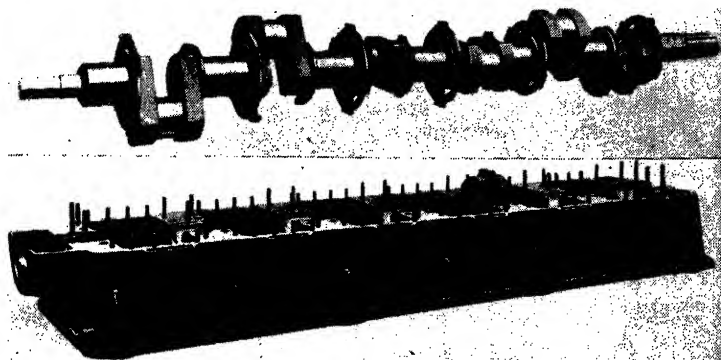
Crankshaft and bedplate of a heavy Diesel engine. (Courtesy Fairbanks Morse & Co.)
